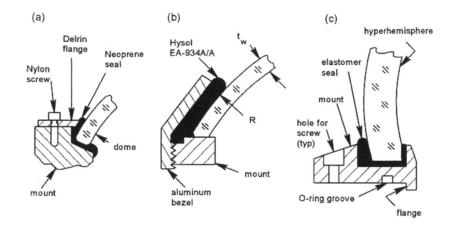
Three configurations for shell/dome mountings. (a) A shell clamped mechanically through a soft gasket by a flange. (Adapted from Vukobratovich.²⁸) (b) A shell constrained by an internal threaded retainer. (Adapted from Speare and Belloli.²⁹) (c) A hyperhemisphere potted with elastomer into its mount.
